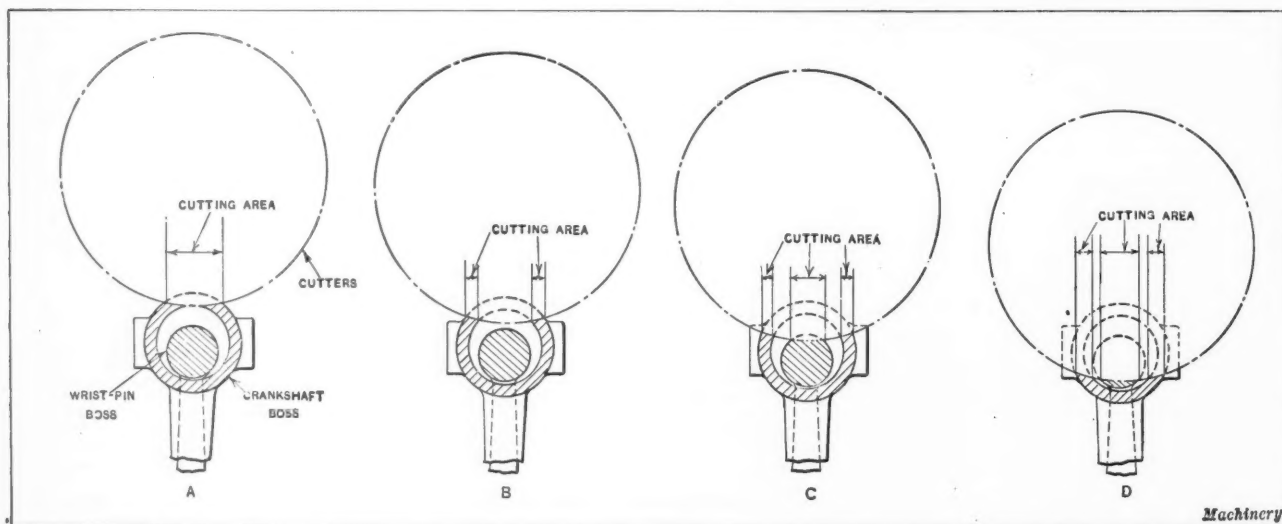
Diagrams showing the Amount of Metal removed at Different Stages in milling One Crankshaft and One Wrist-pin Boss
